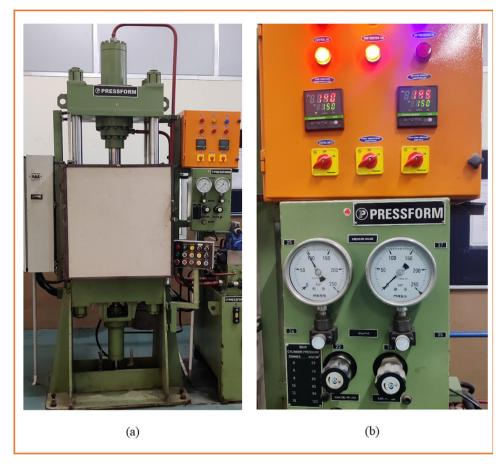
(a) Hot press machine; (b) control setup with operating parameters in a hot press machine.
